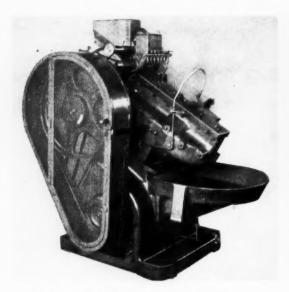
Waterbury Farrel Thread-rolling Machine with Lift-blade Hopper Feed
